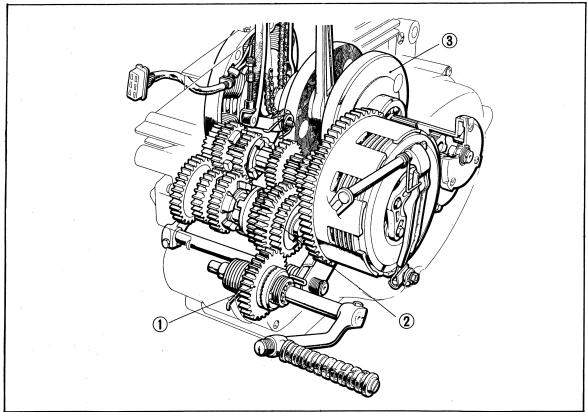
① Kick gear ② Primary starter idle gear ③ Crankshaft
